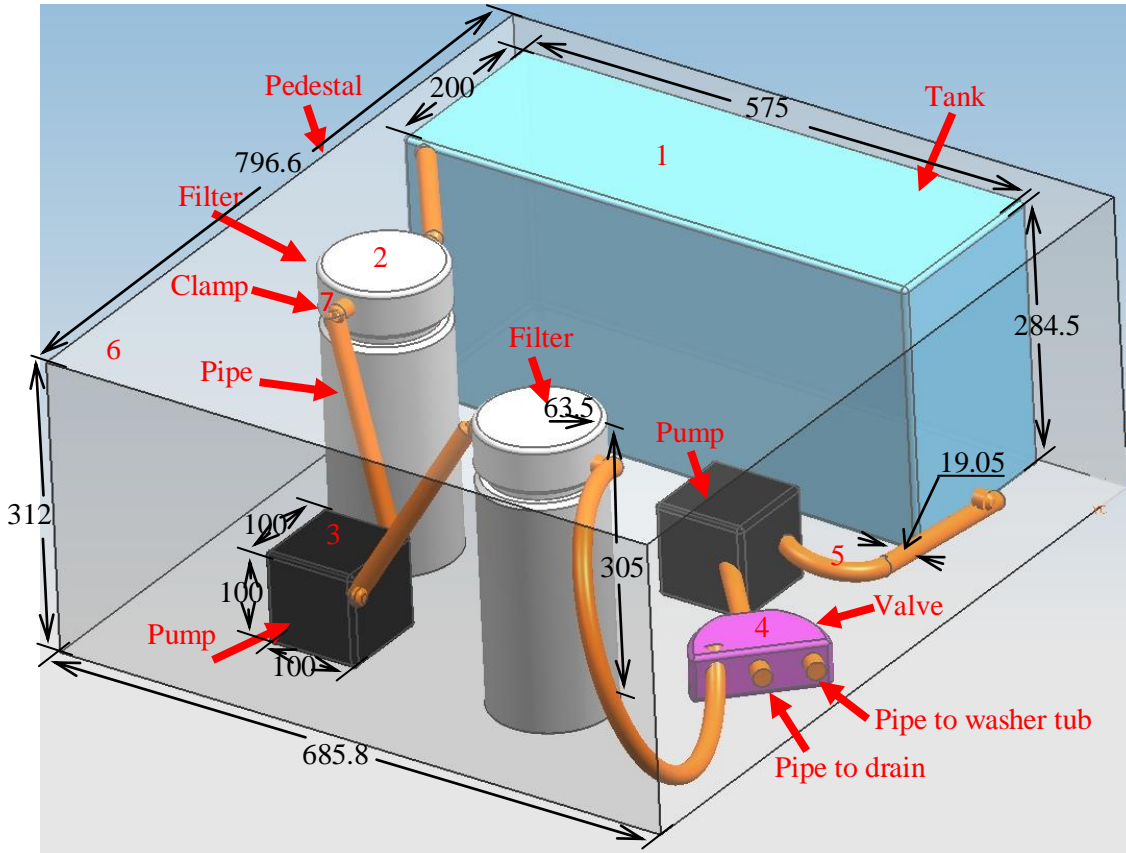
The final design in the pedestal with the unit of the dimensions in millimeter.
